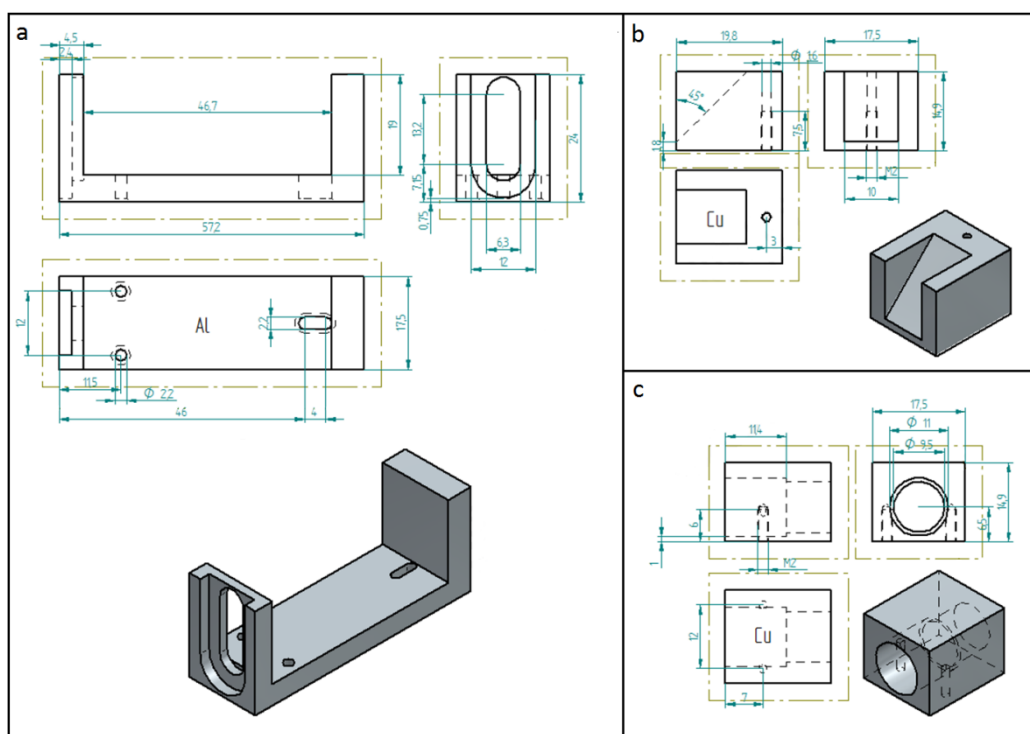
Three-view drawings of the laser adapter cooling unit.
